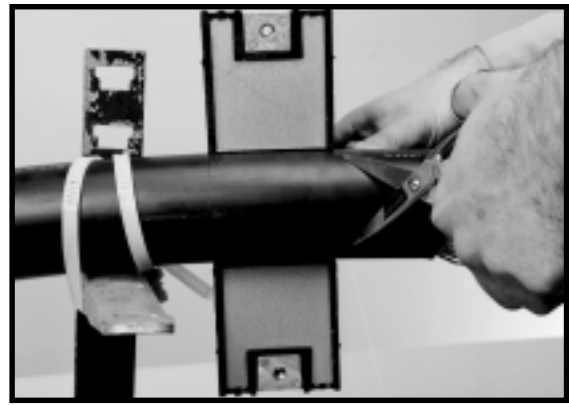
MARKING SHEATH AREA TO BE CLOSED
